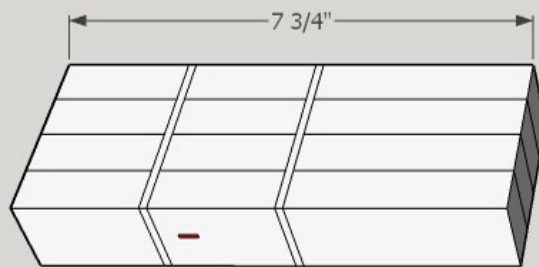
C - Marking Door Handle Location and Milling the 3 Sections
